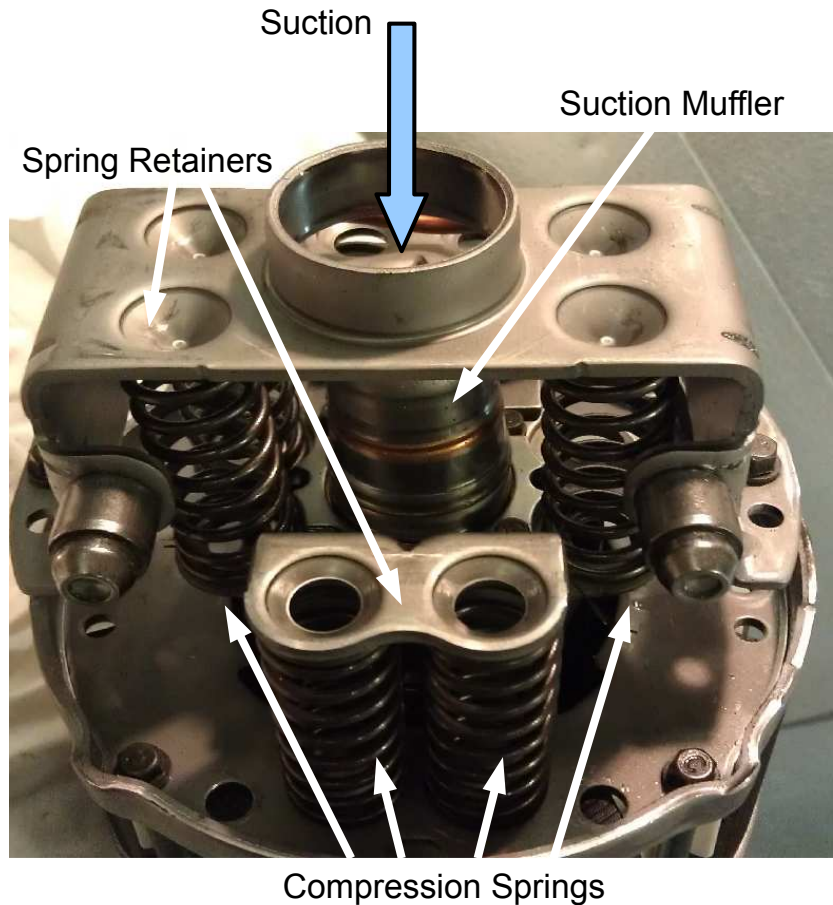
Rear assembly of commercial (LG) linear compressor, with hermetic shell removed, showing the array of mechanical springs and the entrance to the compressor suction muffler.
